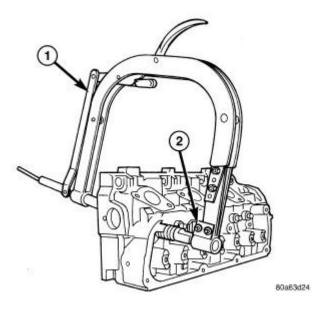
VALVE SPRING - REMOVE/INSTALL Courtesy of CHRYSLER LLC
